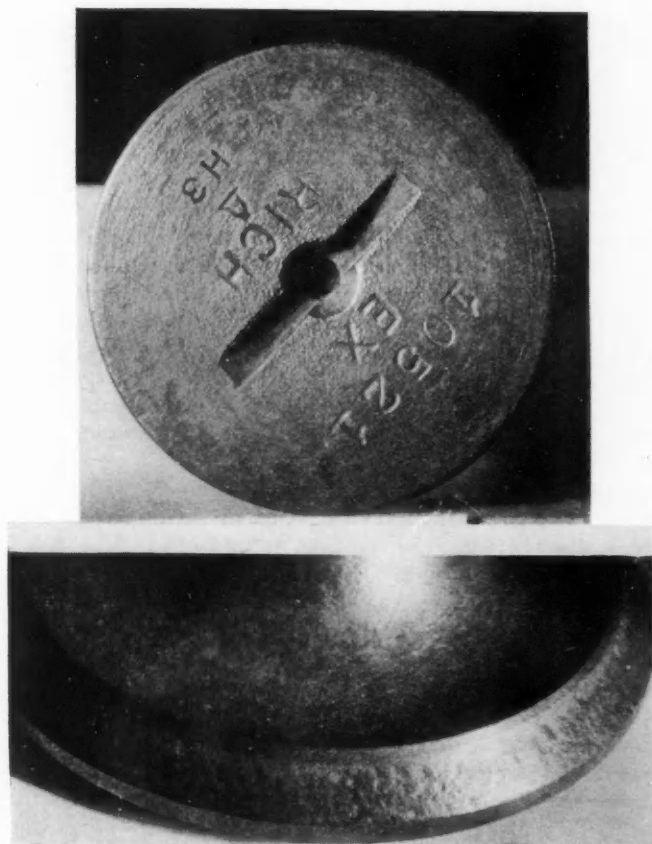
Exhaust Valve, Enlarged, after Cleaning
